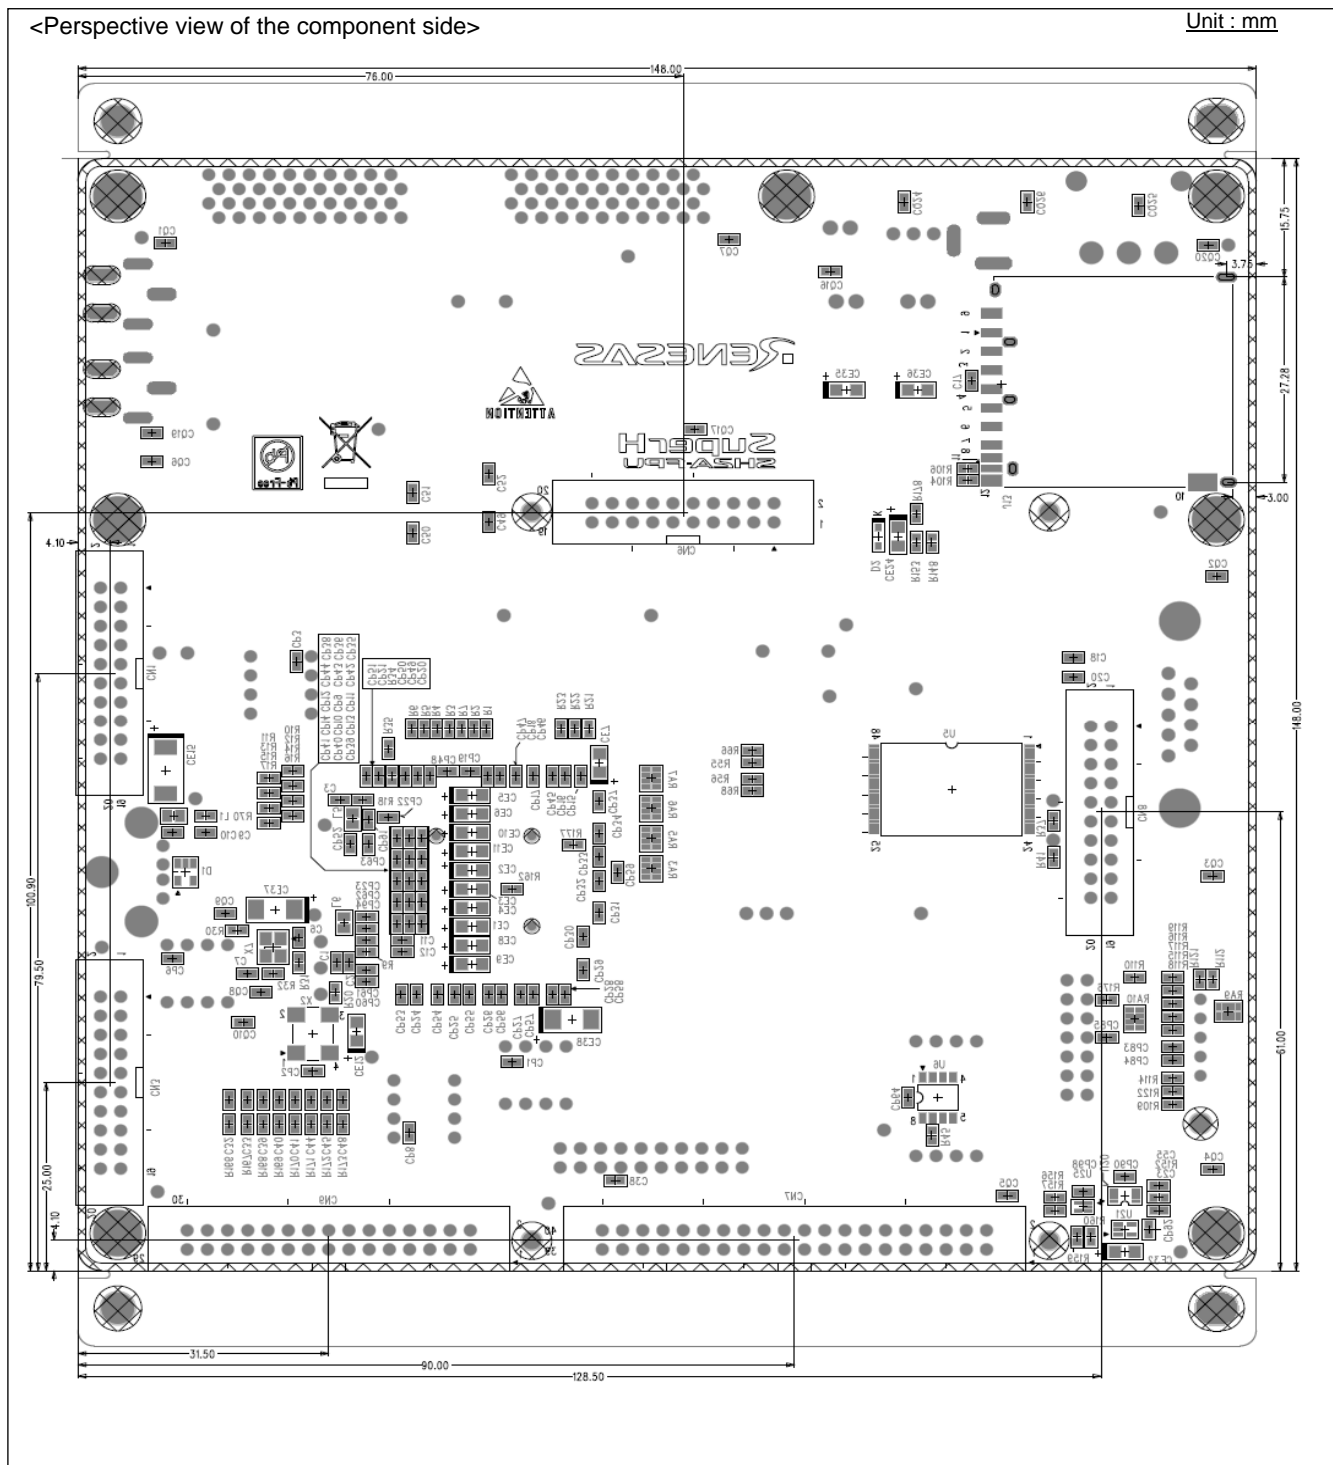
R0K572690C000BR Dimensions (Perspective view of the component side)
